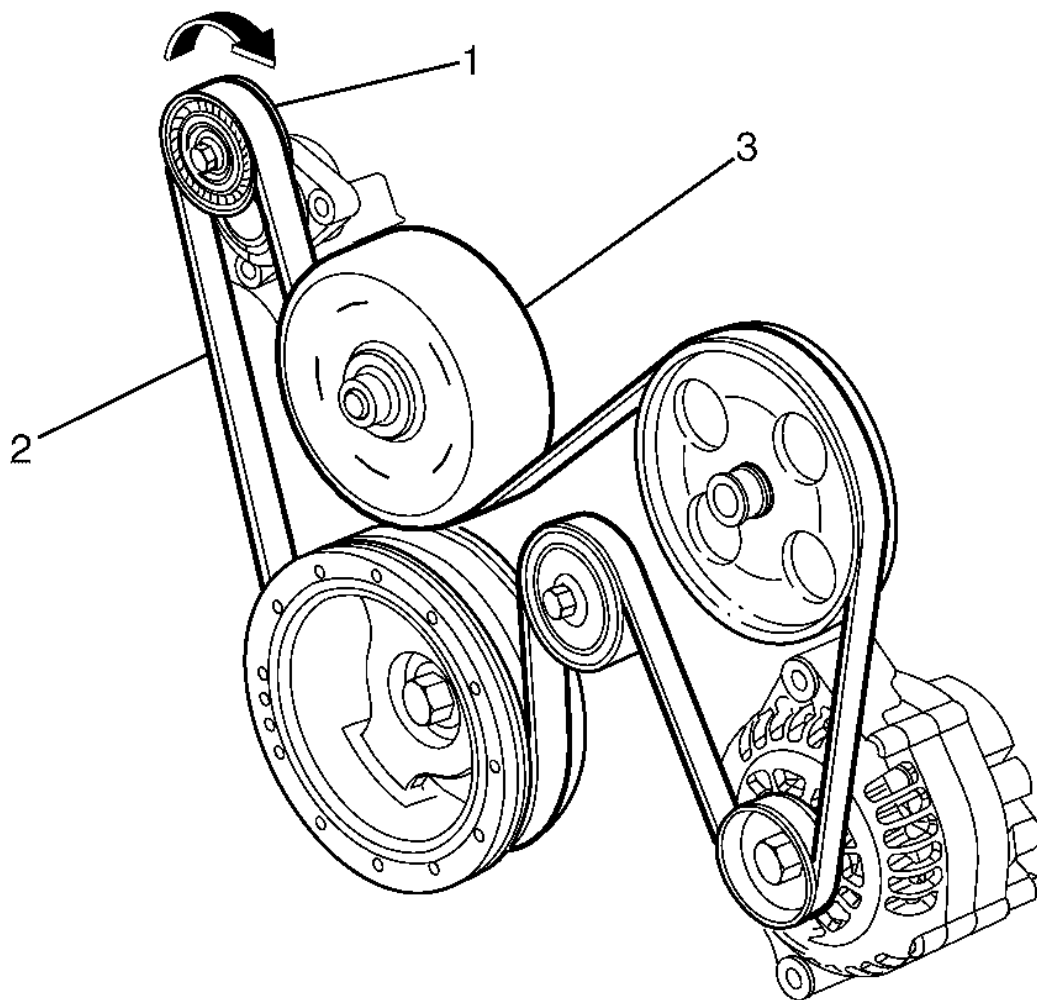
Identifying Drive Belt Tensioner, Accessory Drive Belt & Water Pump Pulley
